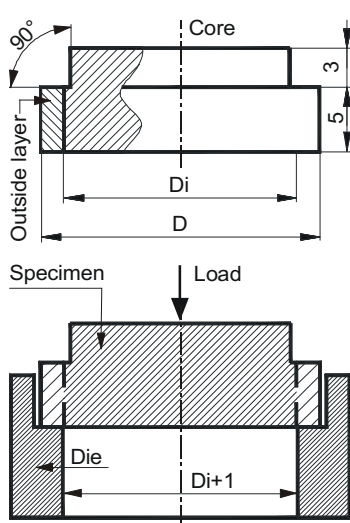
Dimensions of test specimens (a) and testing dies (b) used for the examination of the quality of the bimetal rod joint after explosive cladding and groove rolling
